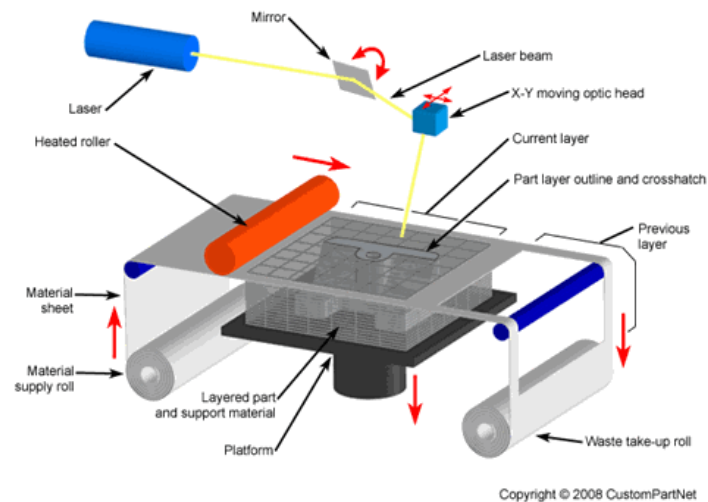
Schematic drawing of the Laminated Object Modelling (LOM) process. A laser cuts out the cross-section from sheets, which are then deposited and adhered by a roller.^[2]
